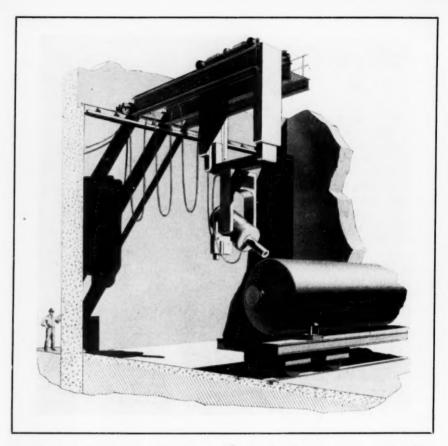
This artist's detail drawing illustrates how the 2-million-volt crane-supported X-ray appears in operation within its own special building.
